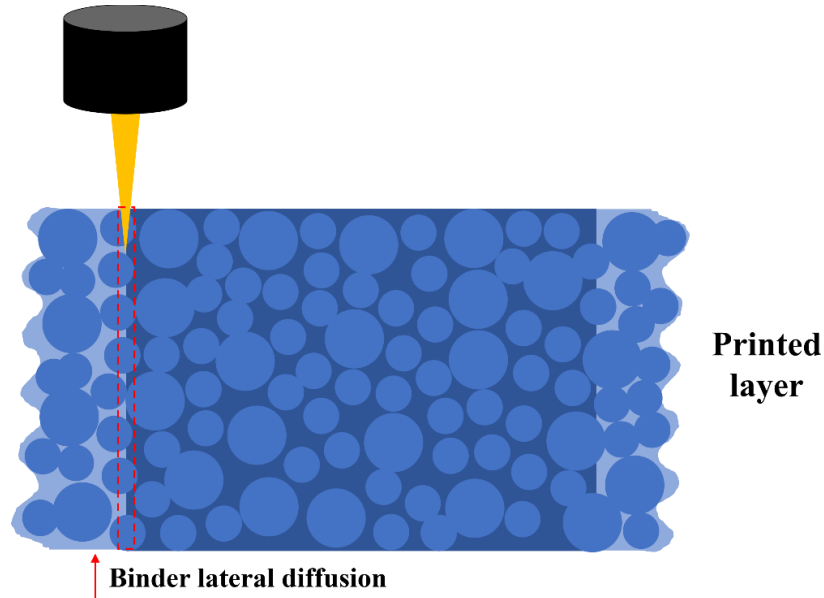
Mechanism of hybridized laser machining on binder jetted layer
